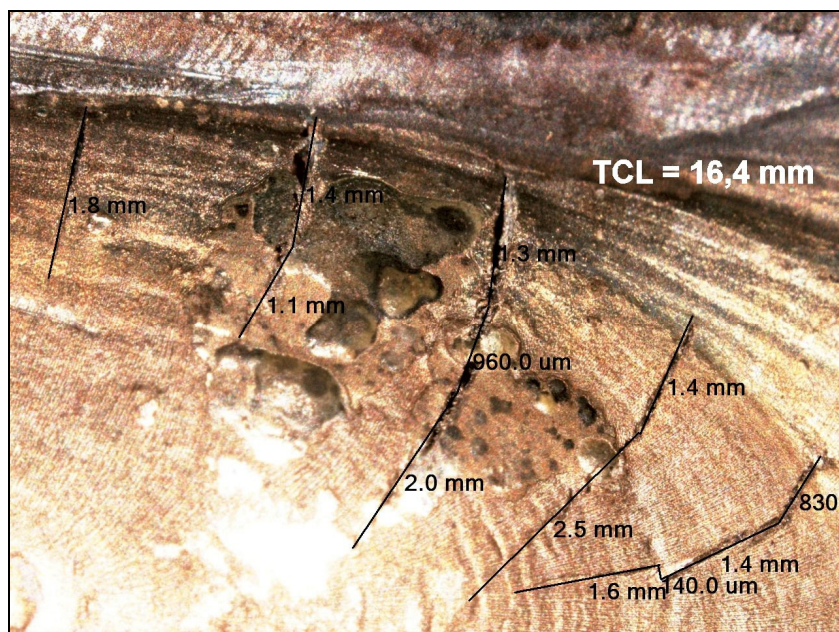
Example of the calculation of the total crack length (TCL) in Alloy 182 weld metal (ongoing project DISSIMILAR METAL WELDS, 2005).
